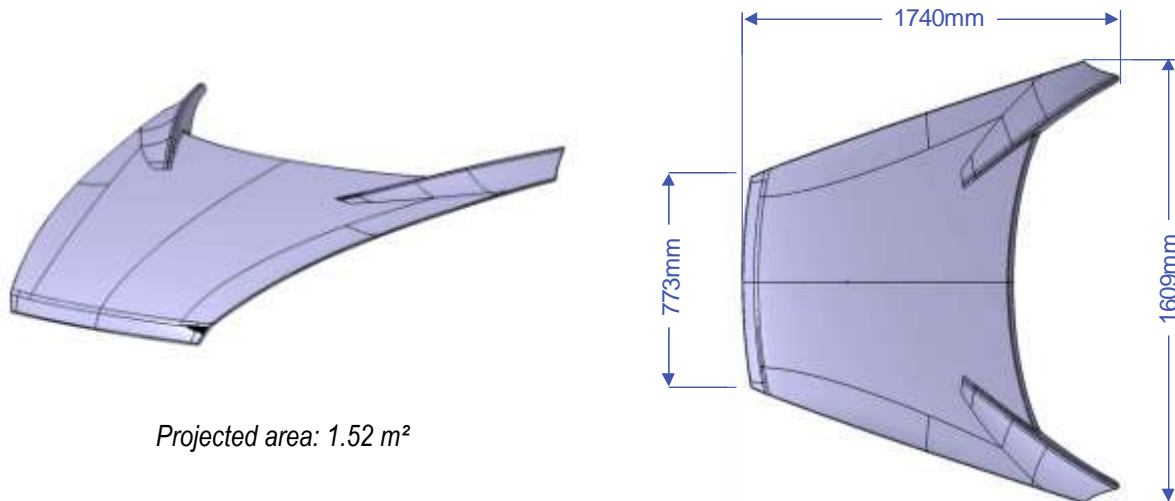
General layout and dimensions of the QarmaQ hood outer skin
